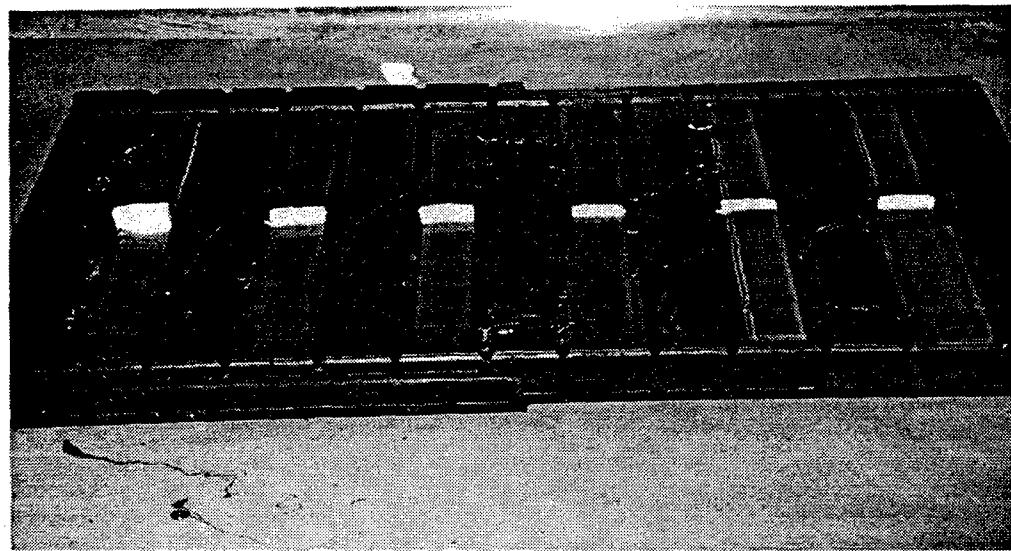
Urethane poured and curing on top of test specimens. Twelve test samples are placed under this mold for coating in urethane.
